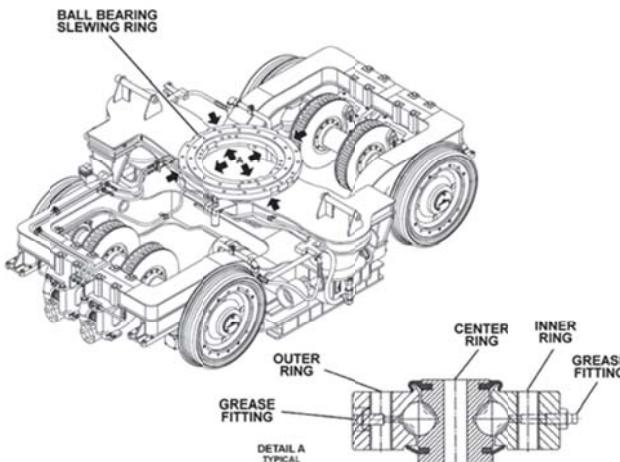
TRAILER TRUCK -BALL BEARING SLEWING RING LUBRICATION
